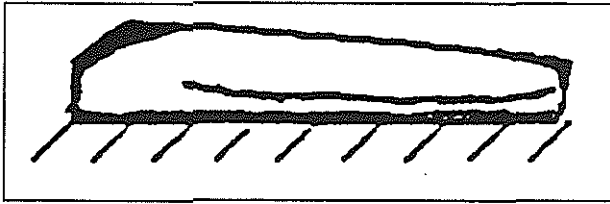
Sketch of Crack in the Output Bevel Gear
